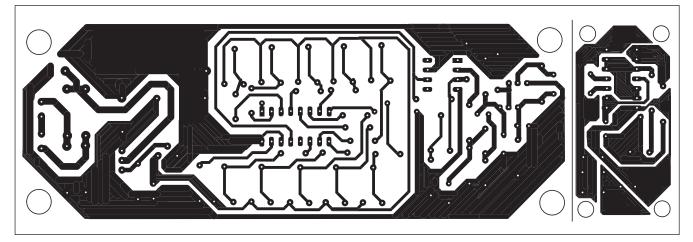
Actual-size, single-side PCB for transmitter and receiver units of the lamp-brightness controller
